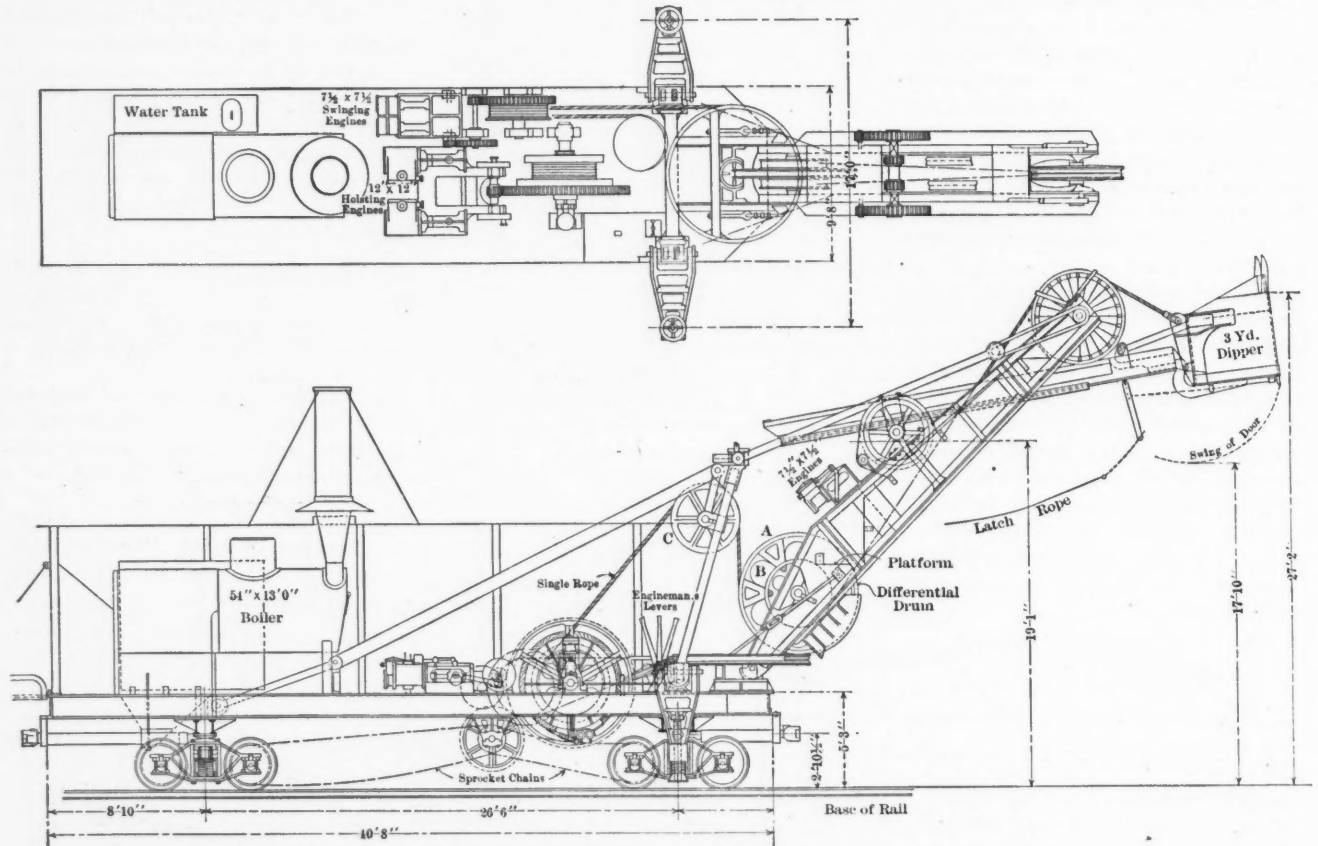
AND 2. PLAN AND ELEVATION OF STEAM SHOVEL.
